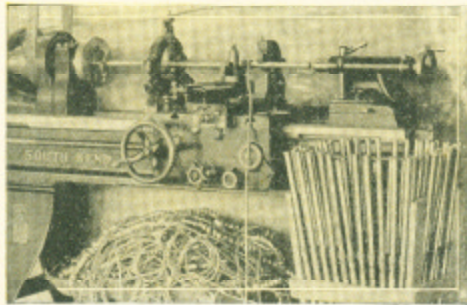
Machining Long Shafts, Using Both Center Rest and Follower Rest.
